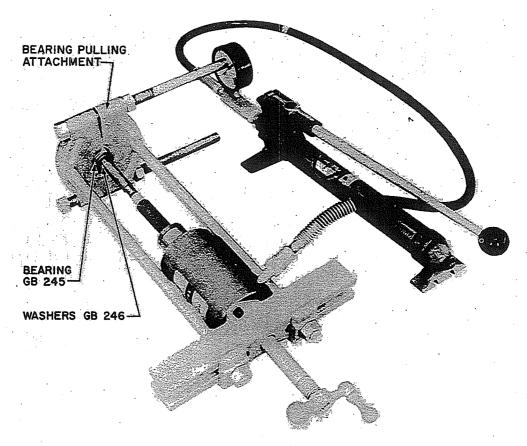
Detector, Installation of Bearing GB245 and Washers GB246
